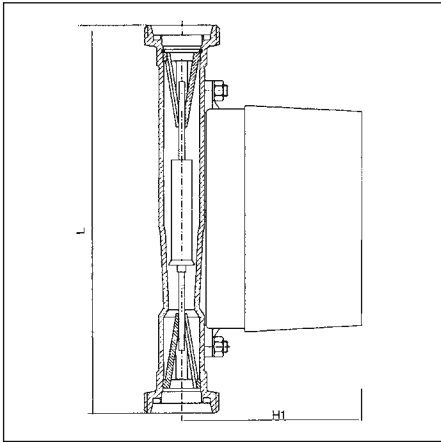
measuring tube with hygienic connection acc. to DIN 11851
